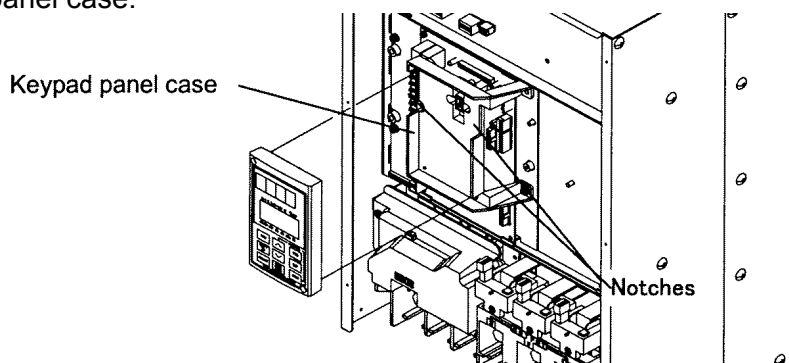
Removing the keypad panel (for inverter of 40HP or more)
